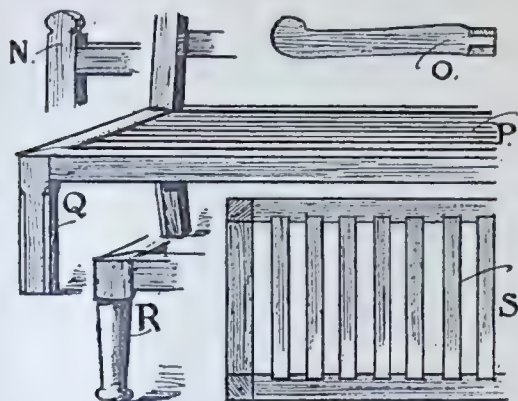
DETAILS OF BACK, ARMS AND LEGS, AND PLAN OF SEAT. (Shows also alternative Lath Seat at P.)
